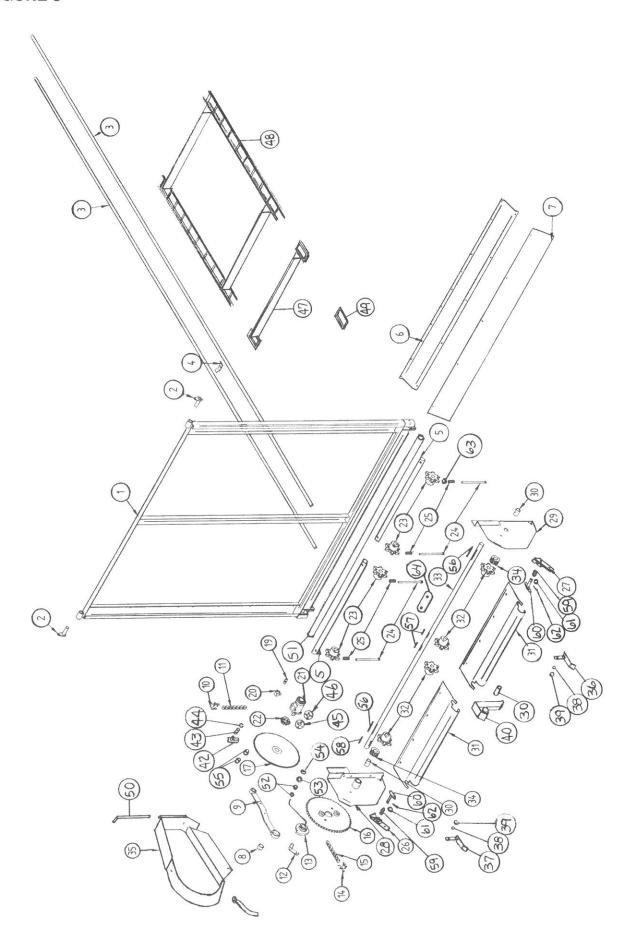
INDUSTRIAL 2-WAY REAR UNLOAD ASSEMBLY
